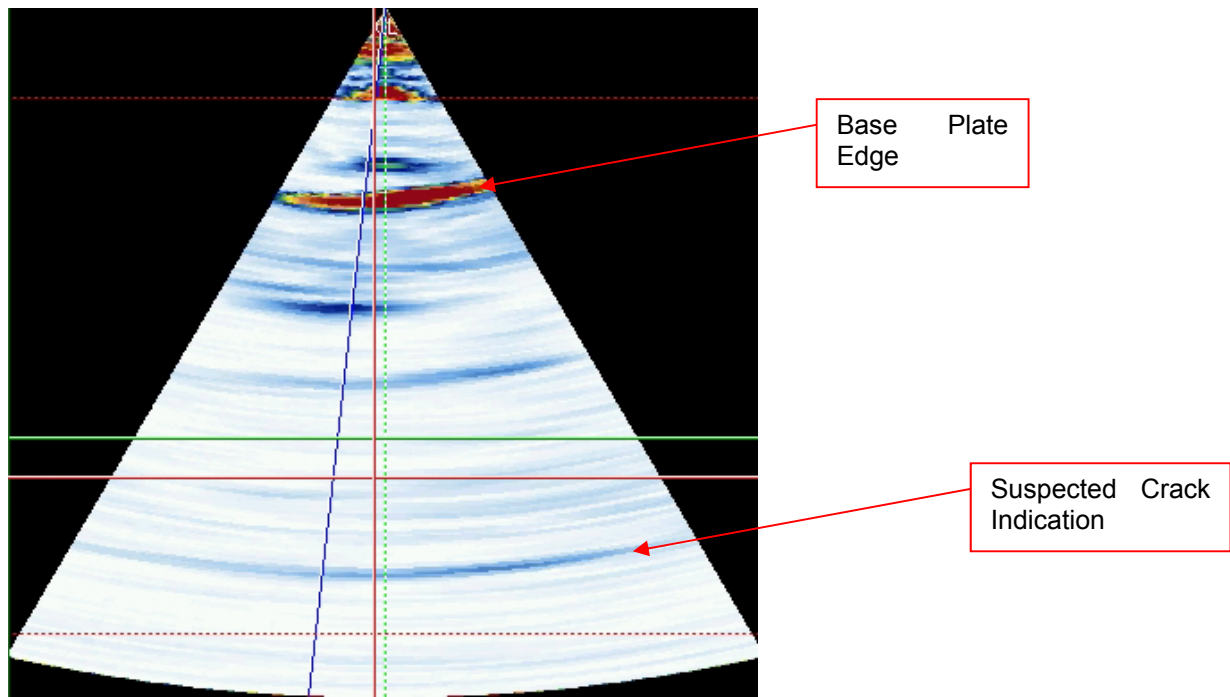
S-scan of tank base of sample Base-T1 showing possible indication of crack in remote fillet weld toe.
